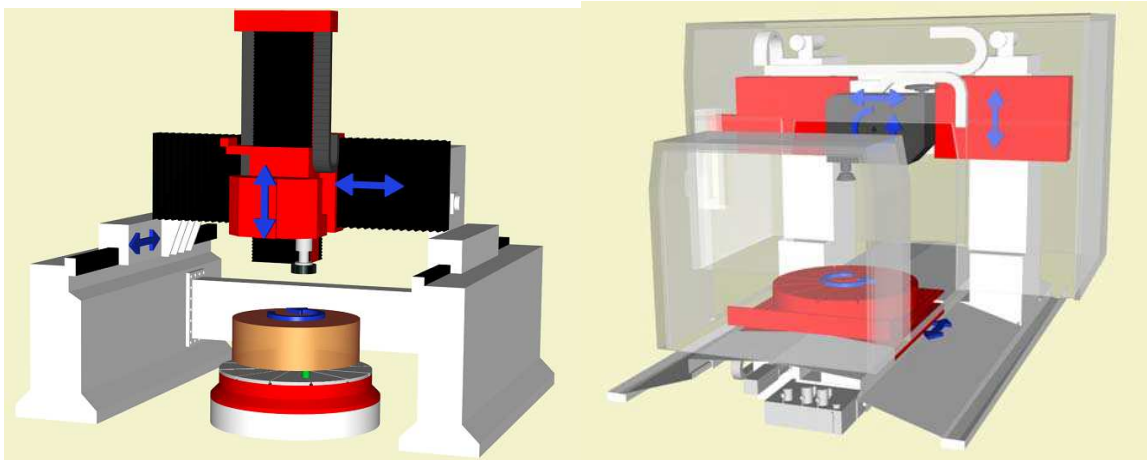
Schematic representation of a 3-axis (left) and 5-axis (right) grinding machine
